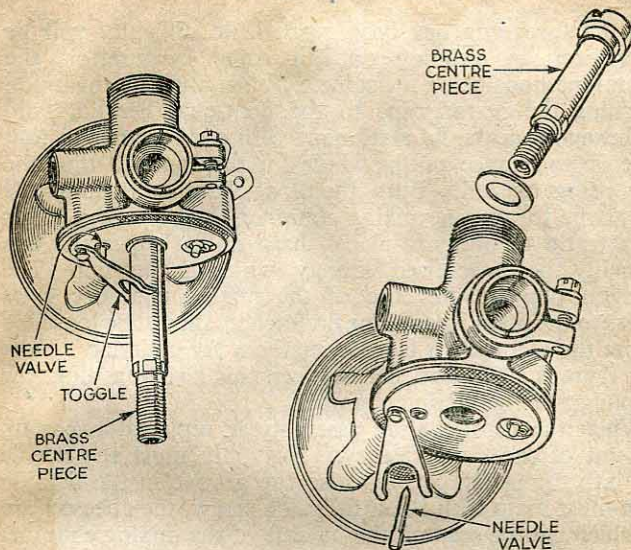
(left)—In order to get at the needle valve which controls the flow of petrol into the carburettor, the brass centre piece is pressed upwards after removal of the screw indicated in Fig. 45. In no circumstances must the toggle be bent or any endeavour made to remove the pin on which the toggle pivots
